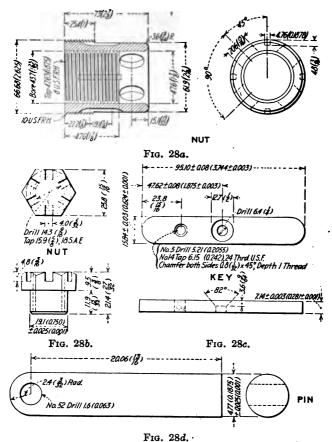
Shaft nut. Fig. 28b.—Nut. Fig. 28c.—Key. Fig. 28d.—Locking pin.
